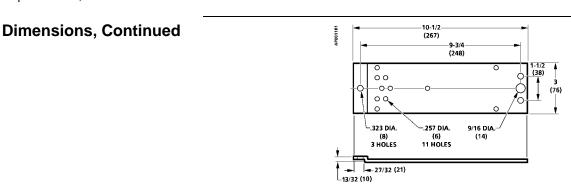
No. 3 Actuator with Fixed Mounting Bracket Dimensions. Dimensions are in Inches (Millimeters).
